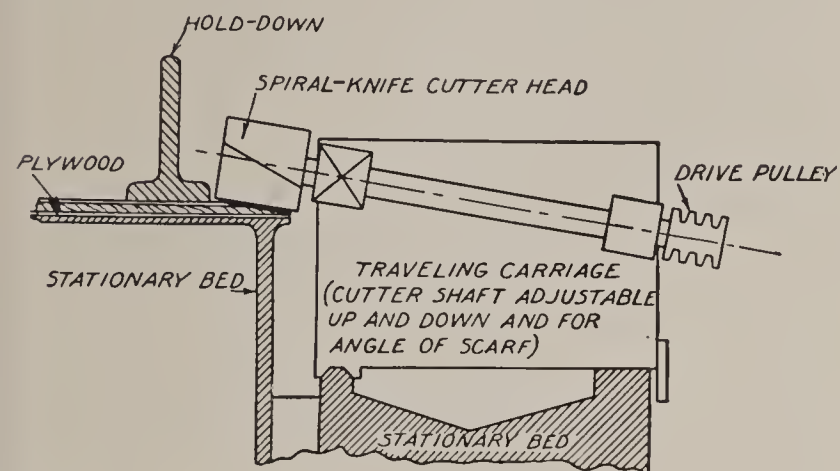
Schematic drawing of machining setup for cutting scarf joints in plywood. Cutter head moves on carriage along edge of plywood, which is held firmly on stationary bed.
